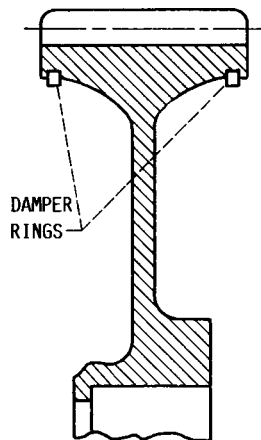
GEAR WITH VIBRATION DAMPER RINGS.
